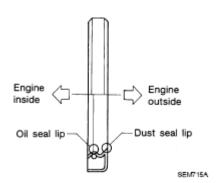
Applying Engine Oil To Both Oil Seal Lip And Dust Seal Lip
